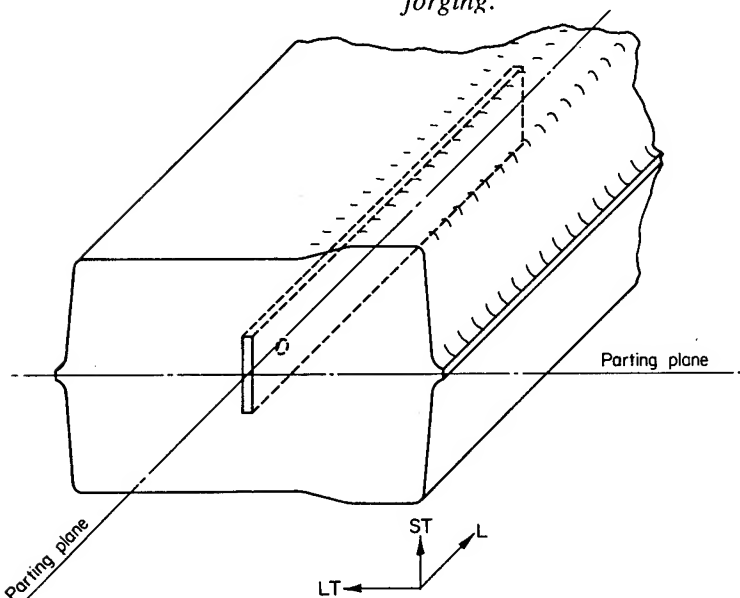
(c). *Bearing specimen orientation for thick-cross section die forging.
